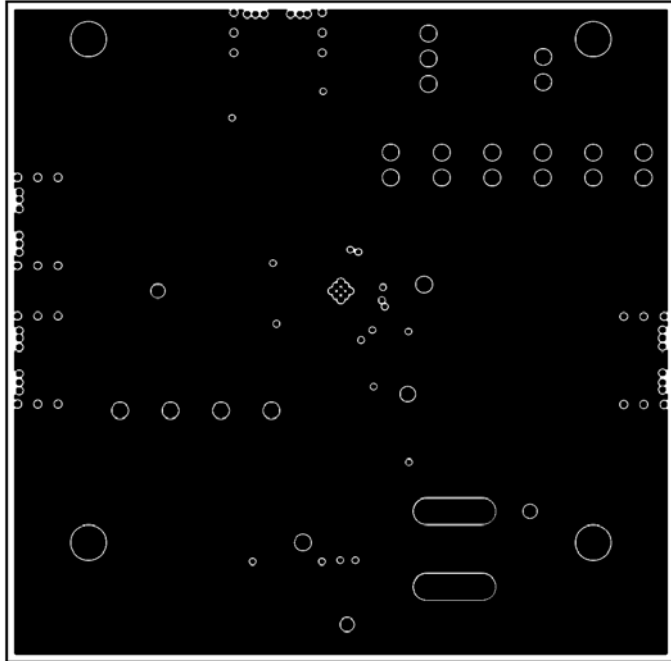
MAX3905 EV Kit PC Board Layout – Power Plane
